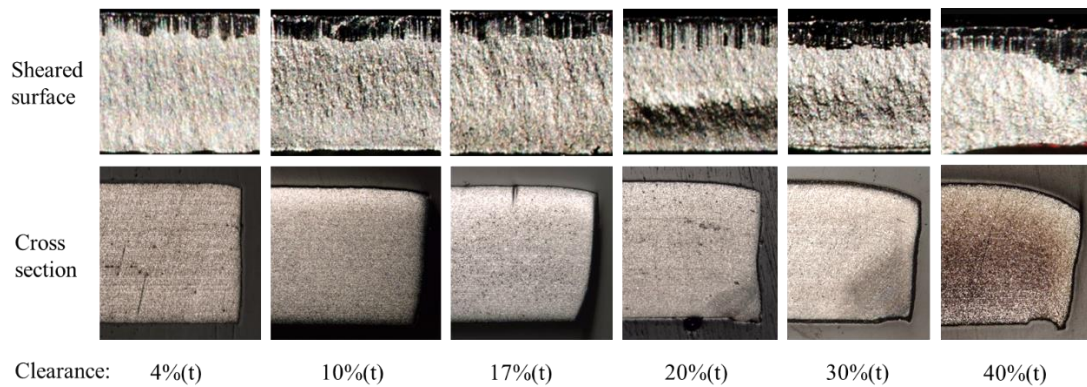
The surface and cross-section of trimmed DP980-1 sheet material for different trimming clearances.
